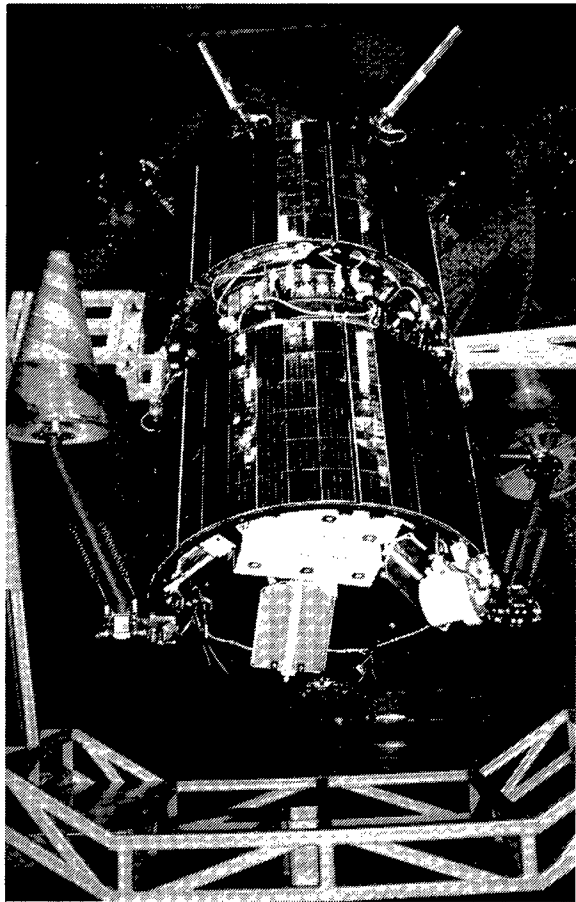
GONETS CLASS SPACECRAFT IN ASSEMBLY.
